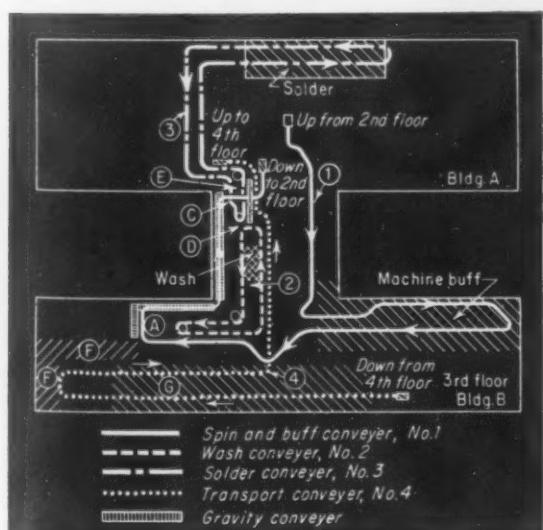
Four conveyer systems serve the 3rd floor of both buildings A and B. Main conveyer, No. 4, feeds all areas located on this floor.
